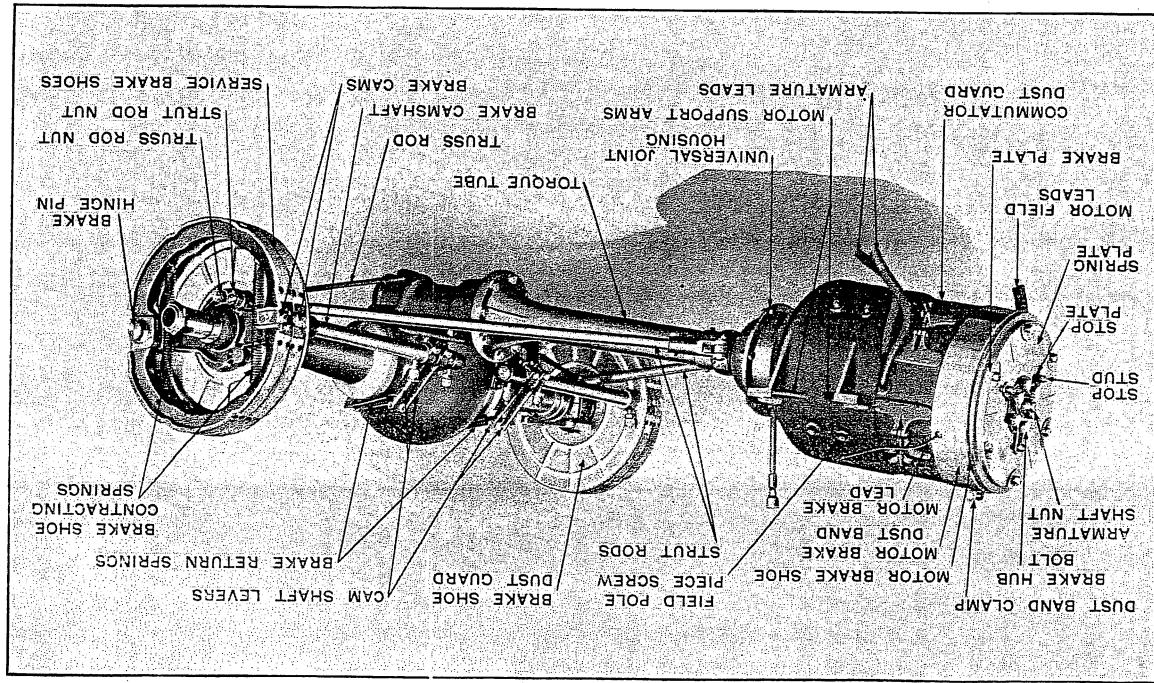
Driving Unit Showing Brakes on Motor and Wheels
